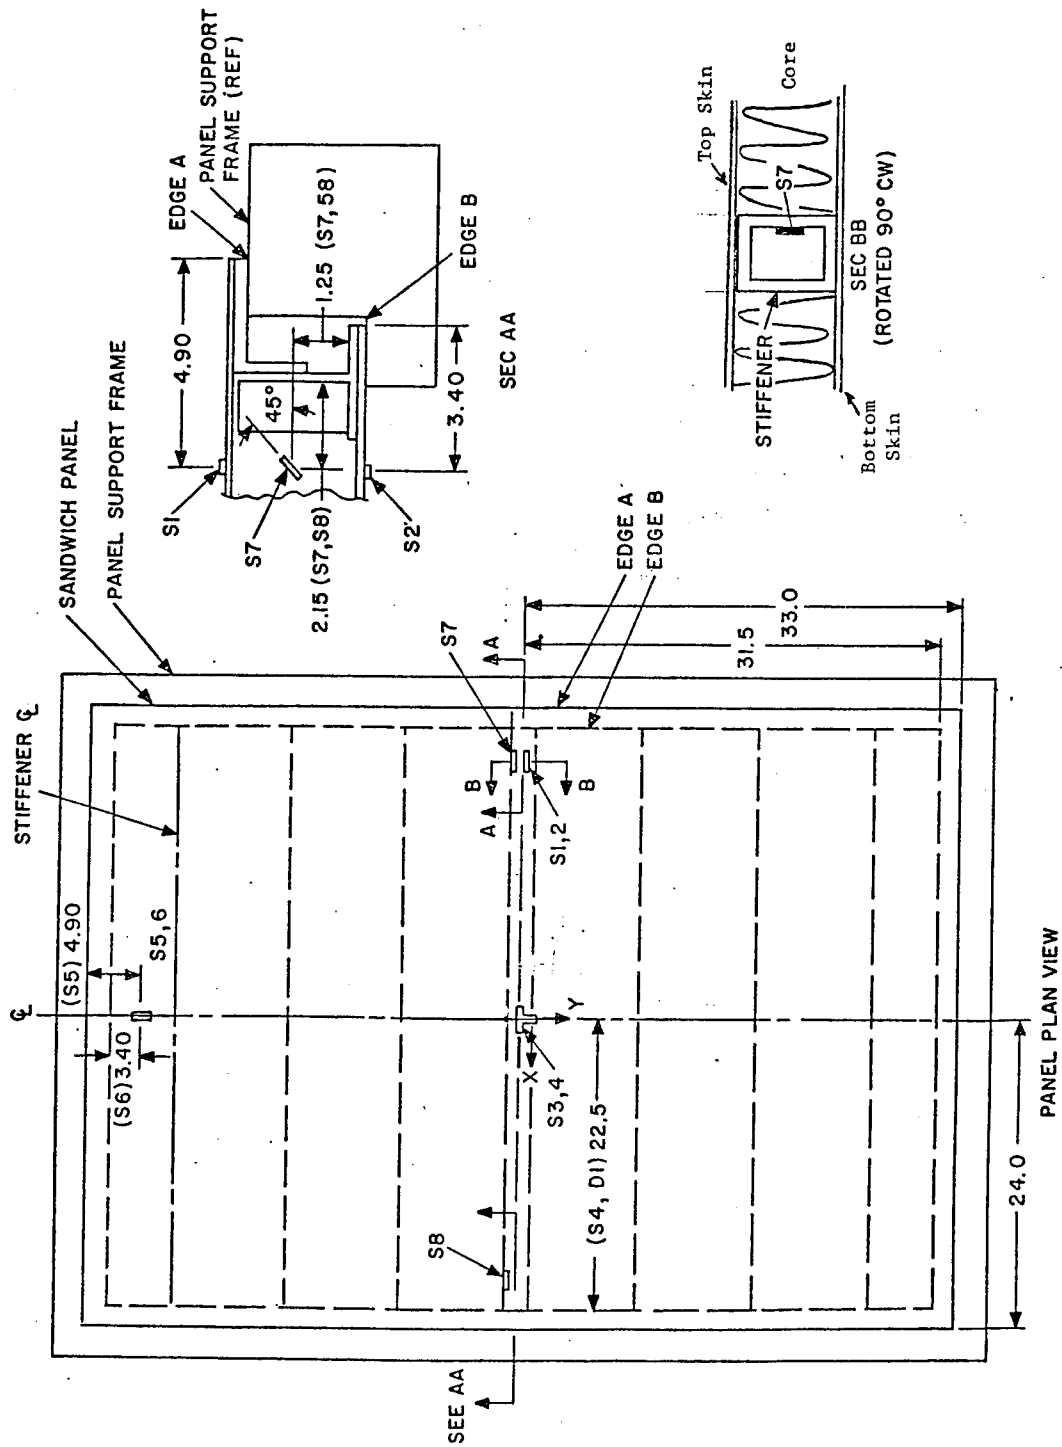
Typical Sandwich Panel Fabrication and Instrumentation Details
